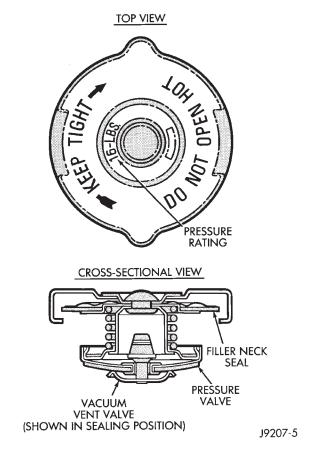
Radiator Pressure Cap and Filler Neck— Typical
